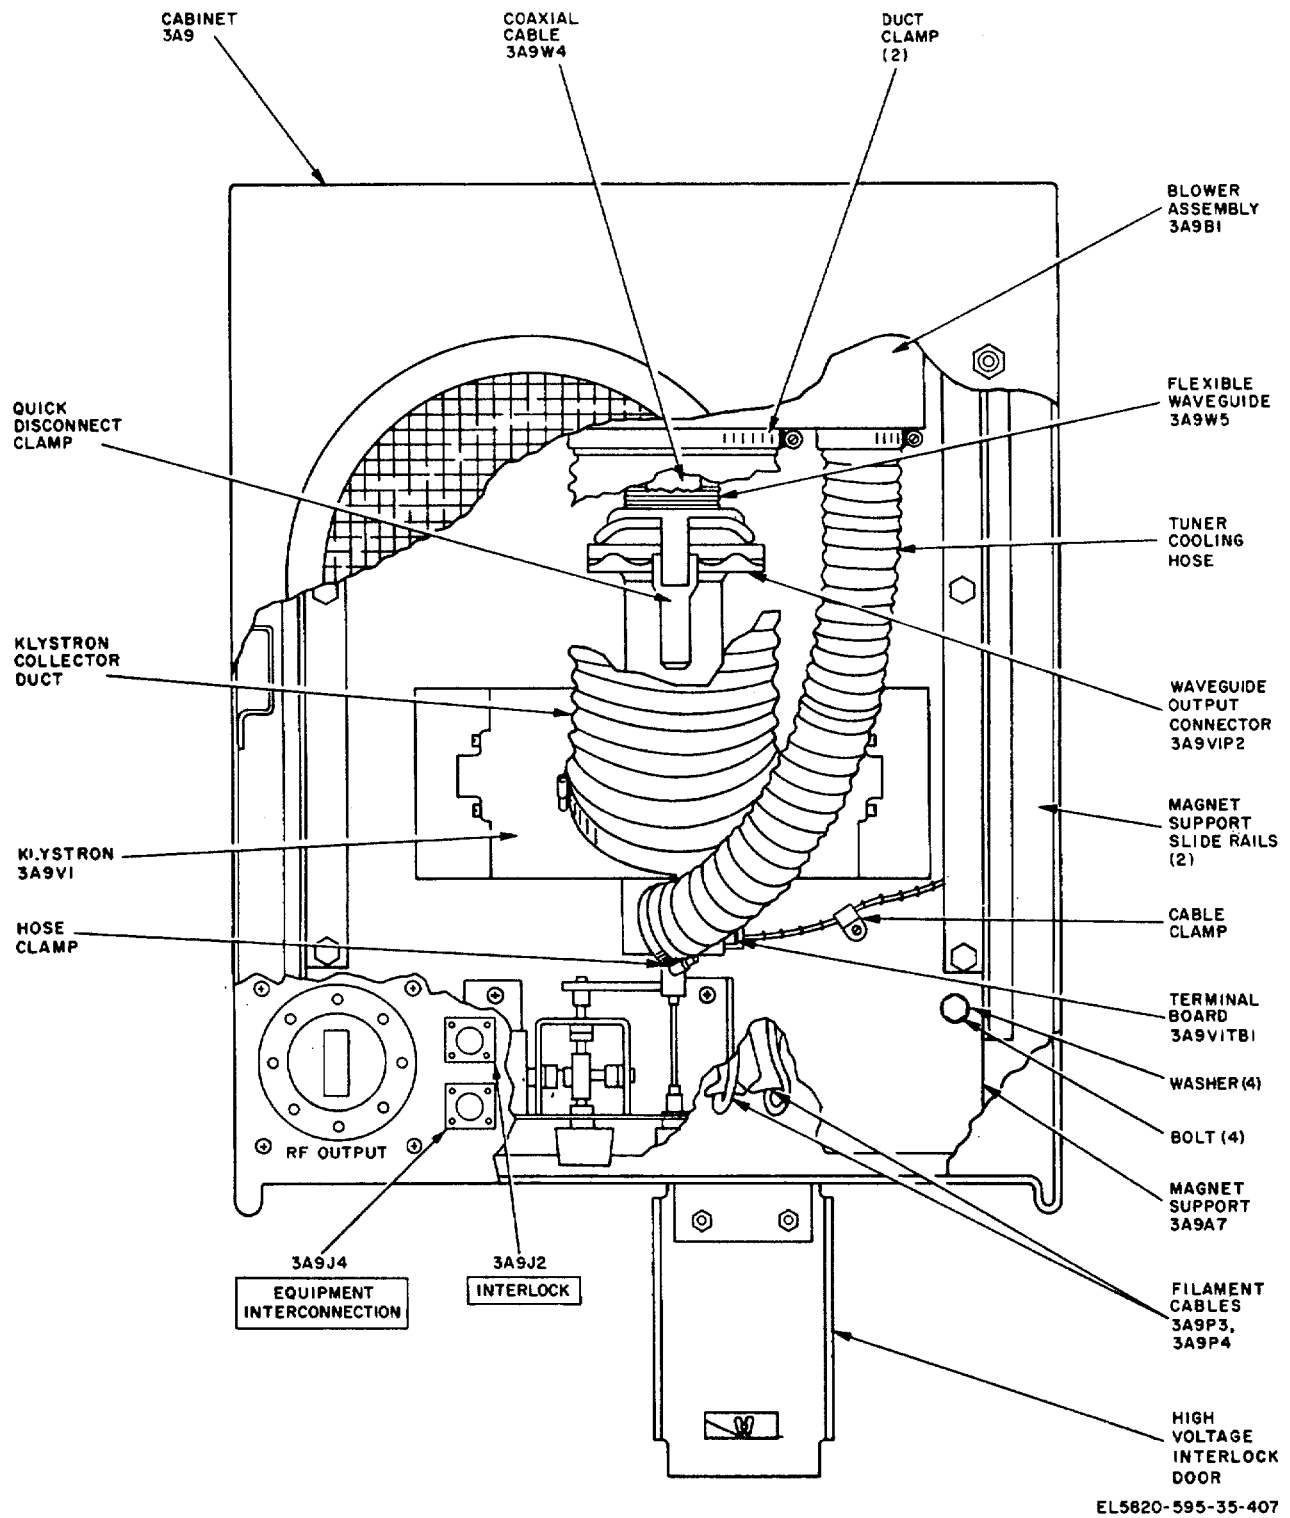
Magnet support SA9A7 with mounted components 3A9V1 and 3A9A6, cutaway, top view.
